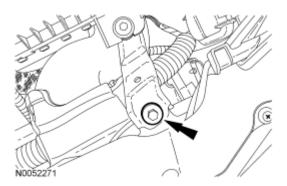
Locating Engine Breather Courtesy of FORD MOTOR CO.
